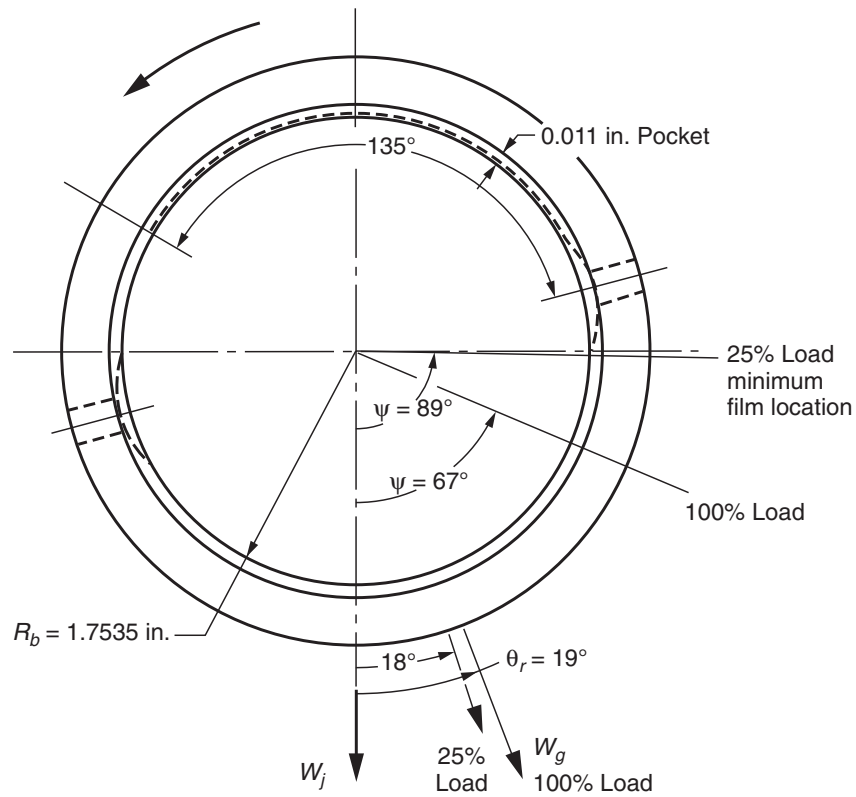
High-speed Gearbox Pressure Dam Pinion Bearing
